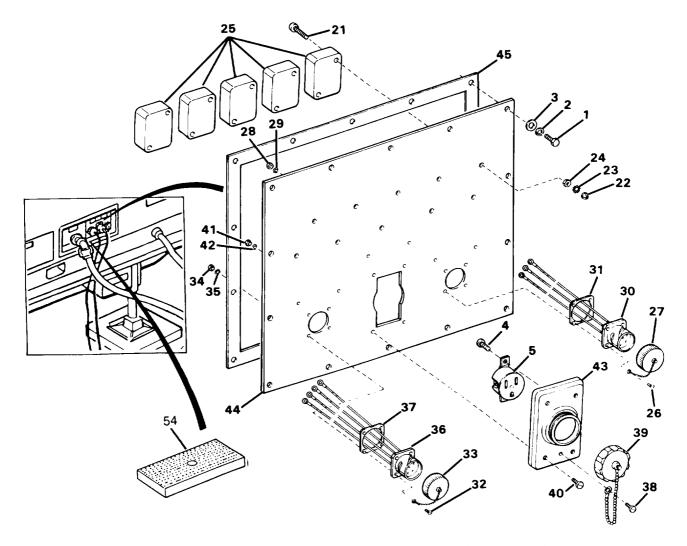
Raw Water Pump External Electrical Panel Assembly (sheet 2 of 3) Components
